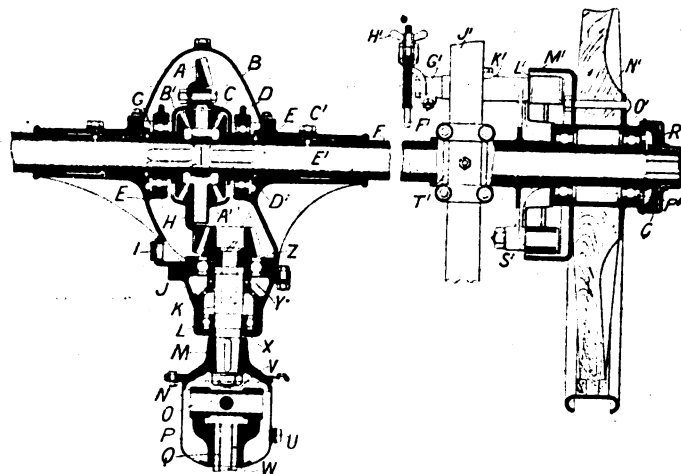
Part Sectional View of Back Axle, showing also the Driving Bevel Pinion.
